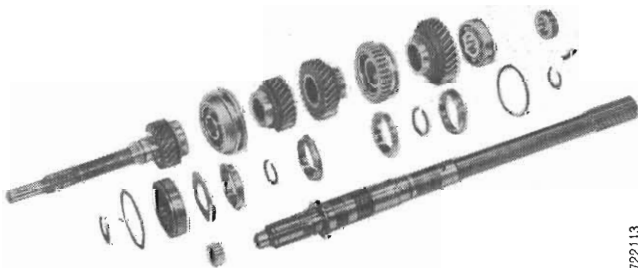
Exploded view—mainshaft and main drive assemblies.
